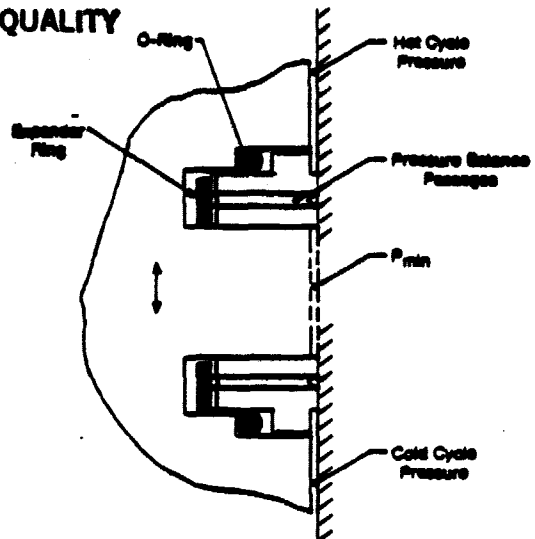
L-Shaped H-Rings (O-Ring Retention) Two Rings/Piston
